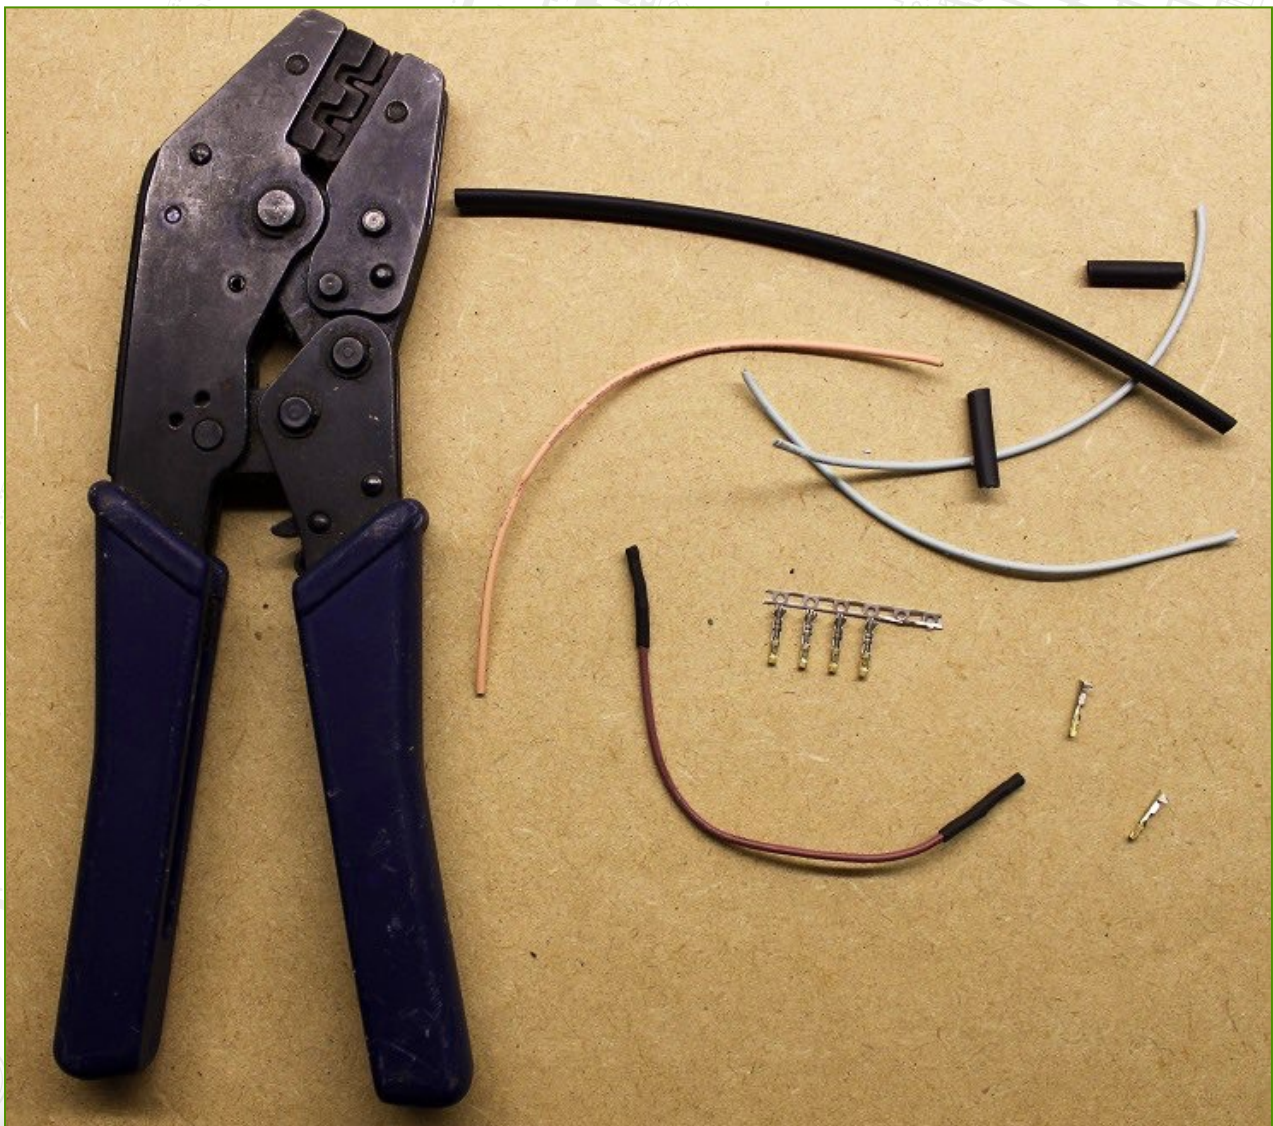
Jumper wire assembly - Crimp Tool is not part of the kit!
